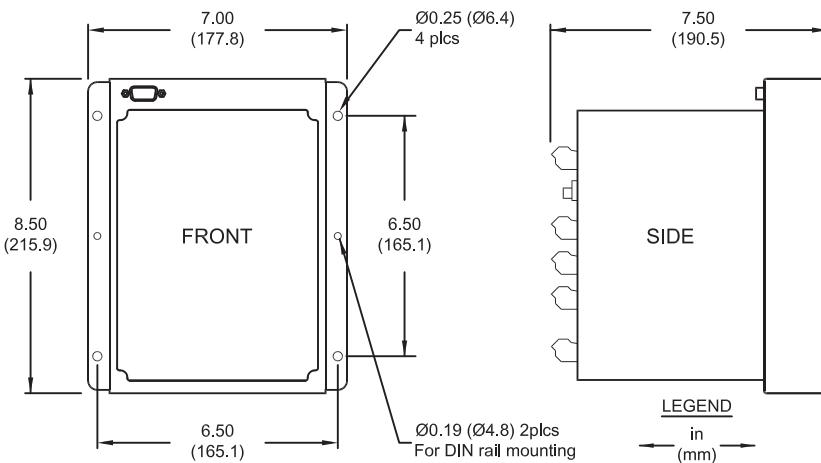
Transformer Automation Controller Surface-Mount Dimensions
